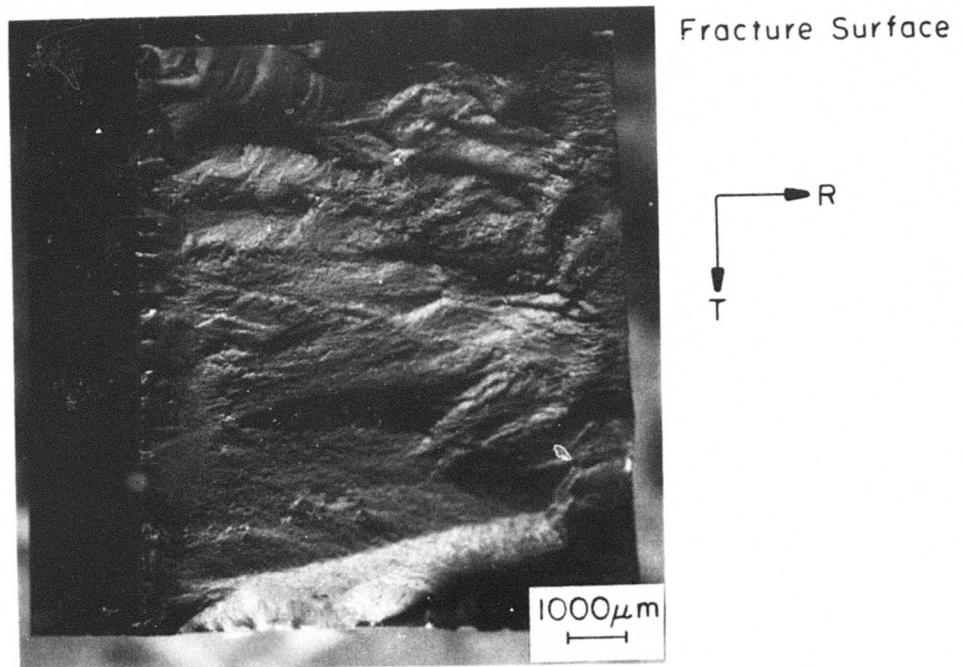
Alloy 227, sample 7ELR11. Fracture surface X8.
